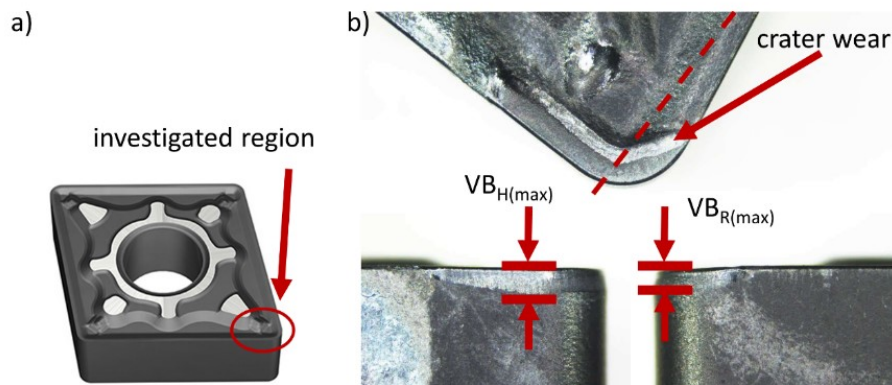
a) The position investigated on the cutting insert in CNMG 120408-M50 geometry (indicated by the red ellipsis). Insert shape: rhombus 80° ; clearance angle 0° ; 12.9 mm cutting edge length; 4.76 mm insert thickness; 0.8 mm nose radius; cutting edge: sharp; cutting direction: two-sided. b) The investigated positions for studying crater and flank wear, indicated by red arrows. The red dotted line indicates the position of the cross-section prepared for further light optical/SEM investigations.
